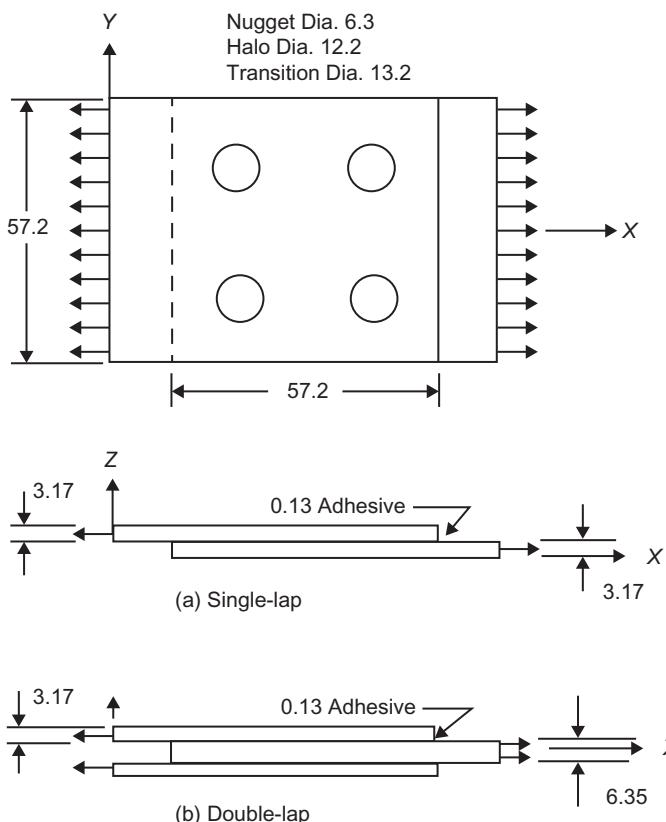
Comparable single- and double-lap weldbond joints [26]. Dimensions are in mm; 1 in = 25.4 mm.
